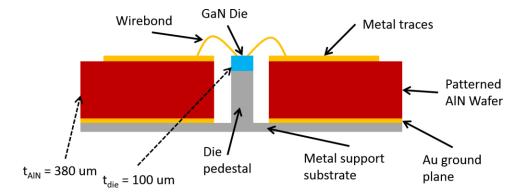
Diagram of hybrid PA module assembly using metal carrier with integrated die pedestal
